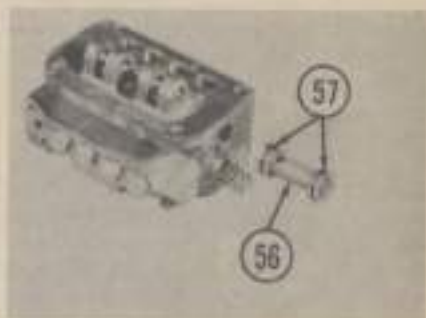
Unloading valve body removed from pump. Always renew "O" rings (57).
